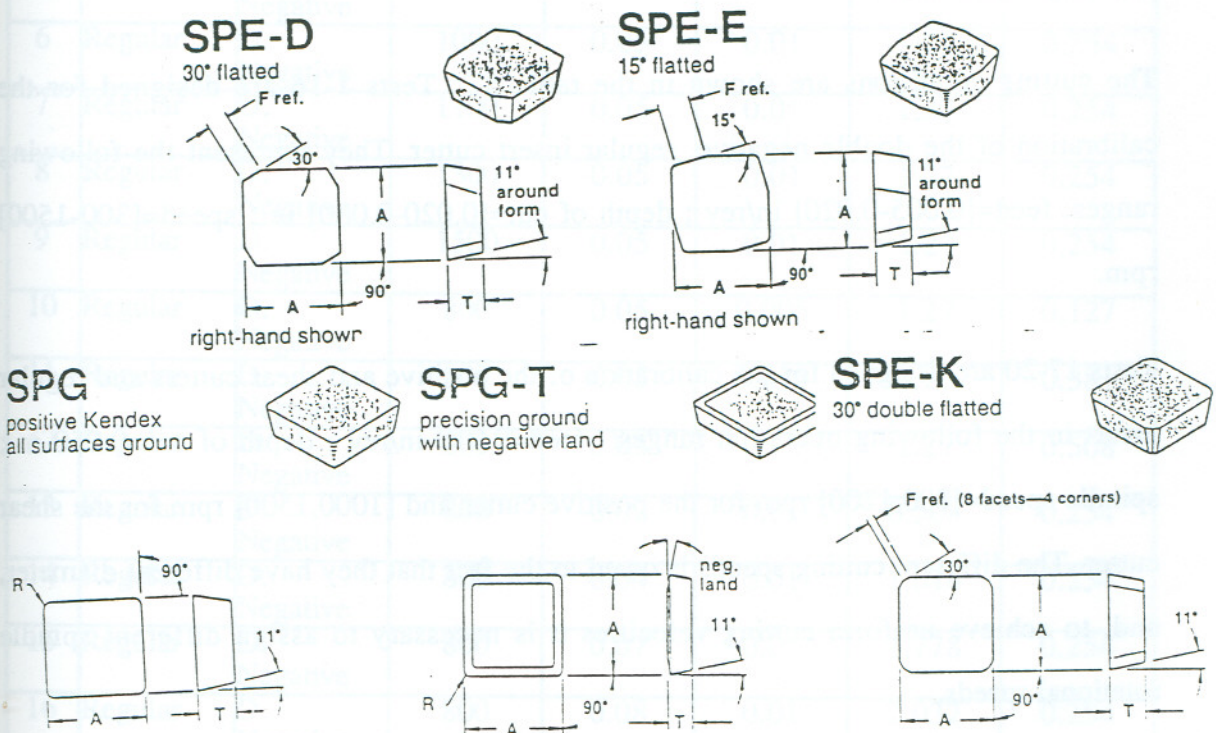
Inserts used in Face Milling tests (Kennametal Co.).
